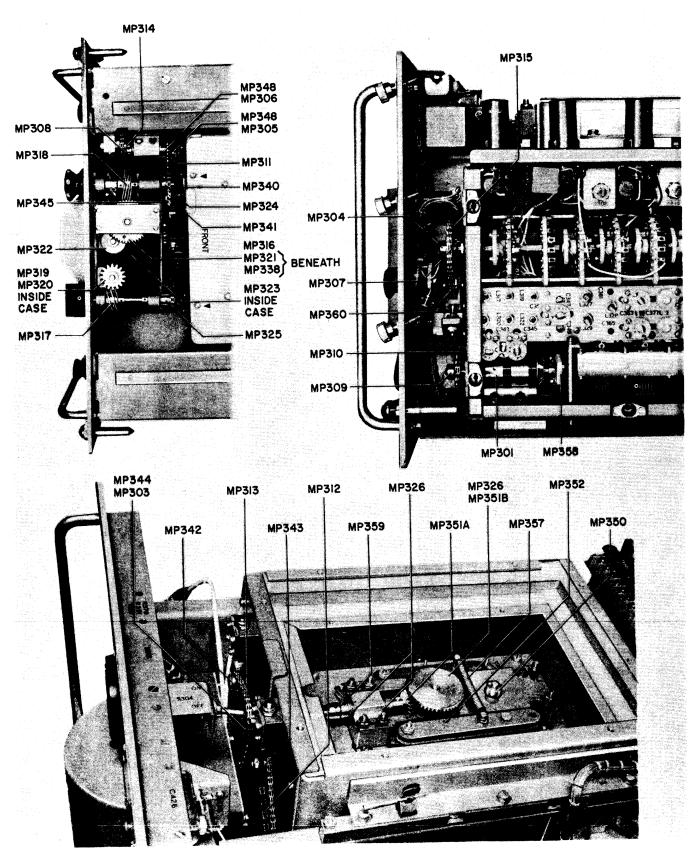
Radi Frequency Oscillator O-581/WRT-2, Master Oscillator Gear Train, L cati n of Parts
